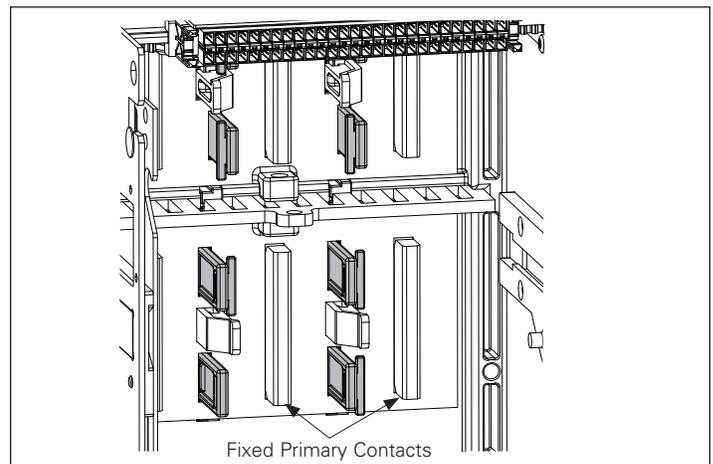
Drawout Cassette (Front View Closeup, Shutters Open)
